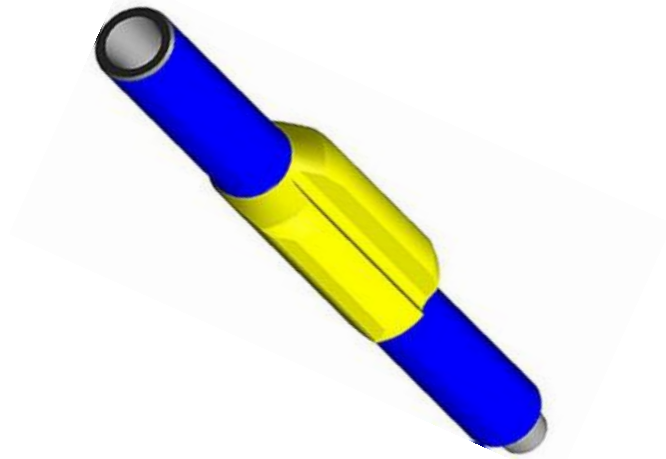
V-Stab Vibration Reduction Tool used within the Bottom Hole Assembly
